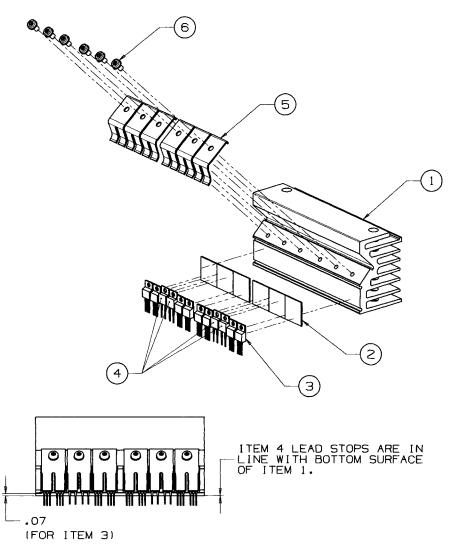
CE4000 PS Output Heatsink Assembly (Exploded View)
